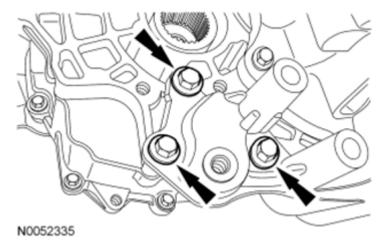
Locating Transaxle Bracket Bolts Courtesy of FORD MOTOR CO.
